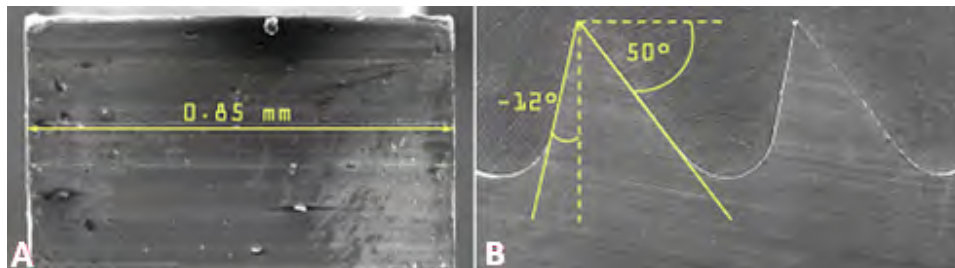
A) Edge Width: B) Rake and Flank of Tooth
